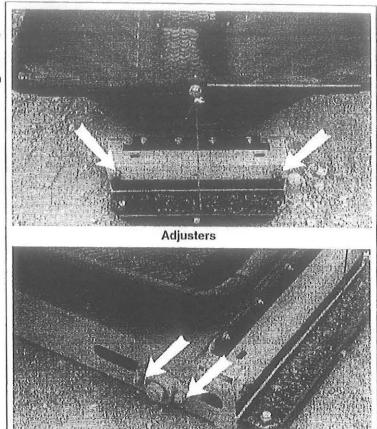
BELTING TENSION (HOPPER END - TYPICAL)
